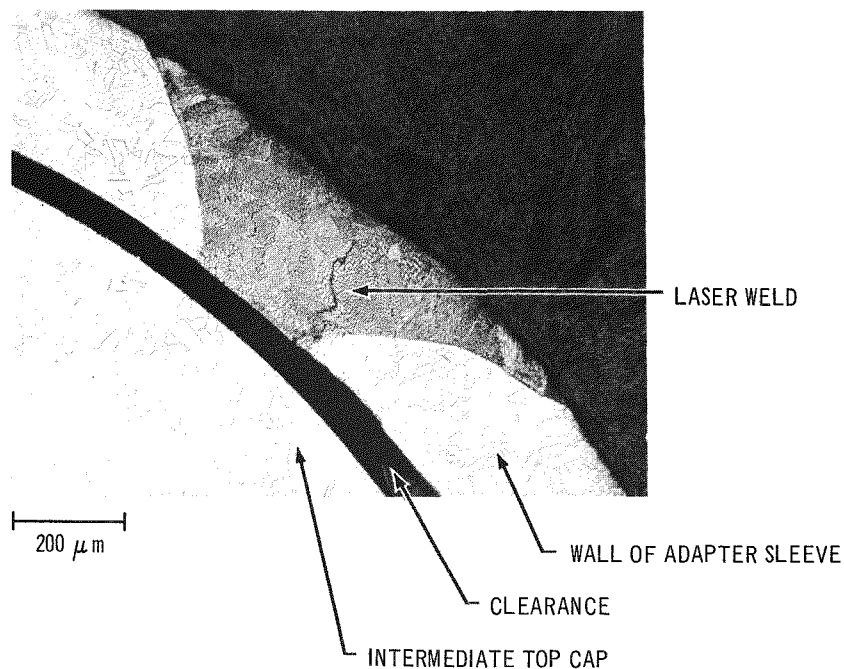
Etched Transverse Cross Section through Laser Closure Weld of Xenon Charging Hole (Crack revealed)
